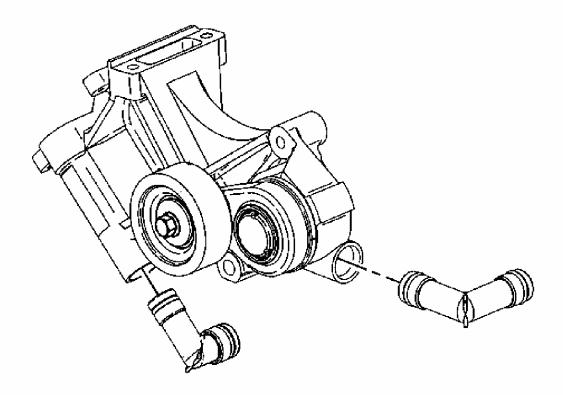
View Of Drive Belt Tensioner Courtesy of GENERAL MOTORS CORP.
